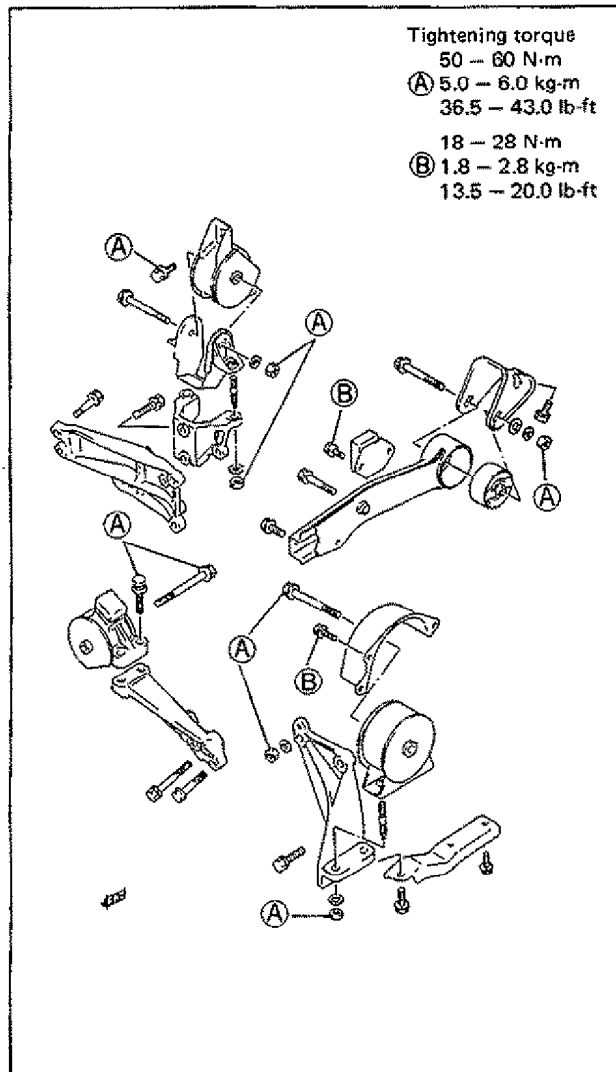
A-131 Engine Mounting (For M/T 2WD Model)
